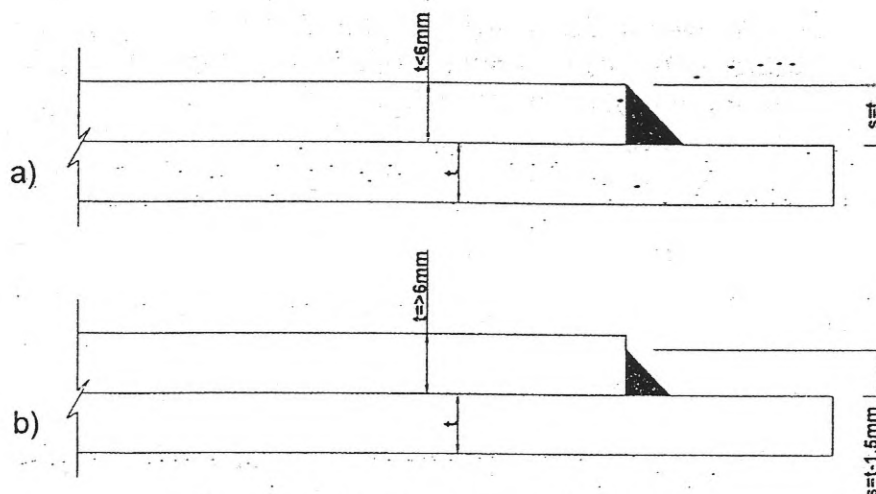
Deposited Fillet Weld Metal
